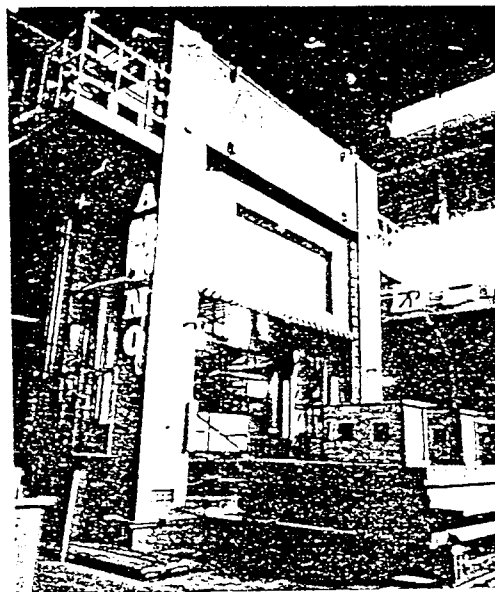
A hydraulic press with a built-in blank-holder cylinder.
